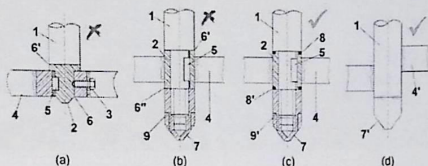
(a) The hub (2) is secured to the shaft (1) by means of a screw (5), which is exposed to product that may collect in and around the screw head. The hub-to-shaft connection gives rise to a metal-to-metal joint (6') that may permit the ingress of product and bacteria. Agitator blades (4) should be welded to the hub, although screw connections are sometimes observed. These exposed screw heads (even bolts with dome head nuts and washers of suitable food grade material) again will create a food safety hazard, and the blade-to-hub connection gives rise to a new metal-to-metal joint (6). To avoid the latter problem, the joint between the blade and the lug on the hub can be sealed by a thin gasket. Keyways (5) exposed to product are not recommended, because product and microorganisms may be retained in the keyway. Keyways may require additional design and/or cleaning practice to ensure drainage and cleanability, e.g. spray ball and wand additions, increased CIP flow and adjusted spray coverage. (b) Once the hub (2) is secured to the shaft (1), an end cap (impeller nut, 7) is screwed on the interior male thread end of the shaft. The non-welded impeller hub-to-shaft and hub-to-end cap connections give rise to crevices and metal-to-metal joints (respectively 6' and 6'') that may allow the ingress of product and bacteria. In that way, the keyway (5) also may retain product and microorganisms. The sharp corners of the spanner flats (9) on the end cap may be difficult to clean. (c) Food quality gaskets under controlled compression respectively may seal the propeller hub to the shaft (8) and to the end cap (8'). Keyways (5), where employed due to mechanical design considerations, shall have edge radii not less than 3mm. The corners of the spanner flats on the end cap have been radiused (9'). (d) An all-welded impeller assembly (e.g. hubs, blades, end cap) is still preferred. Impeller hubs welded to the shaft are preferred over removable hubs. The designer may omit the hub and immediately attach the blades to the shaft by welding (4'). Finally, the end cap can be welded to the shaft (7') (CFR, 1997; Lelieveld et al., 2003; Hauser et al., 2004b; ASME, 2009).
